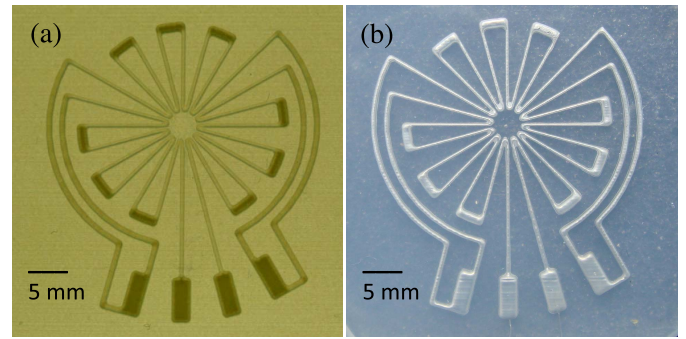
(a) Photo of the 3D printed mold used for fabricating the microchannel elastomer structure. (b) Photo of the microchannel embedded elastomer sheet after injecting eGaIn.
